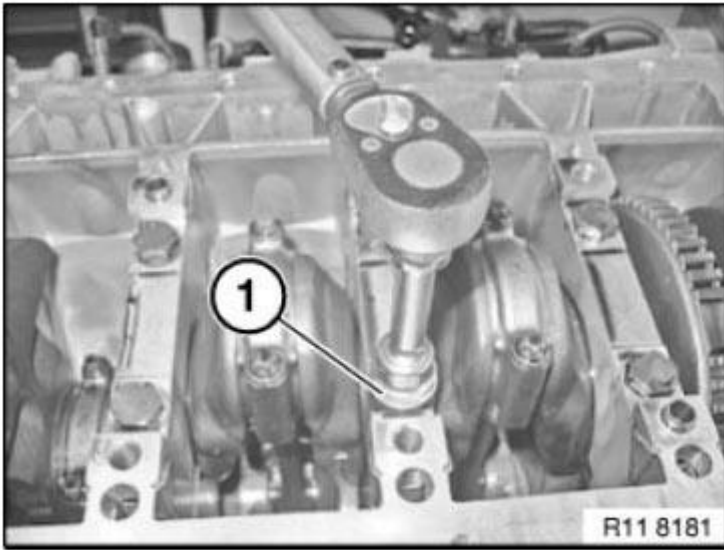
Positioning Crankcase Lower Section On Crankcase Upper Section
